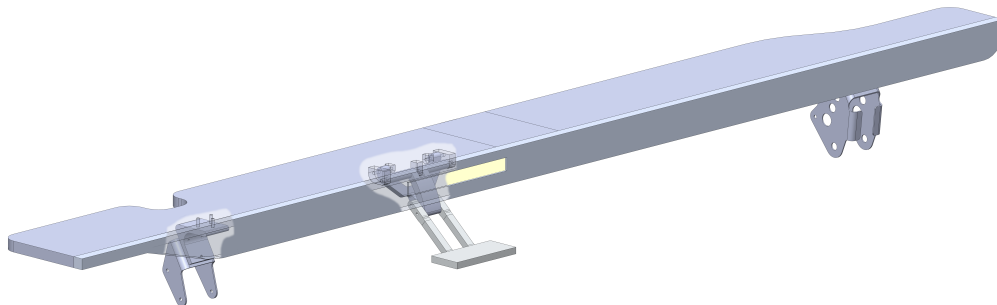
Finished Board Step design with Add Step Assembly and Fixtures
